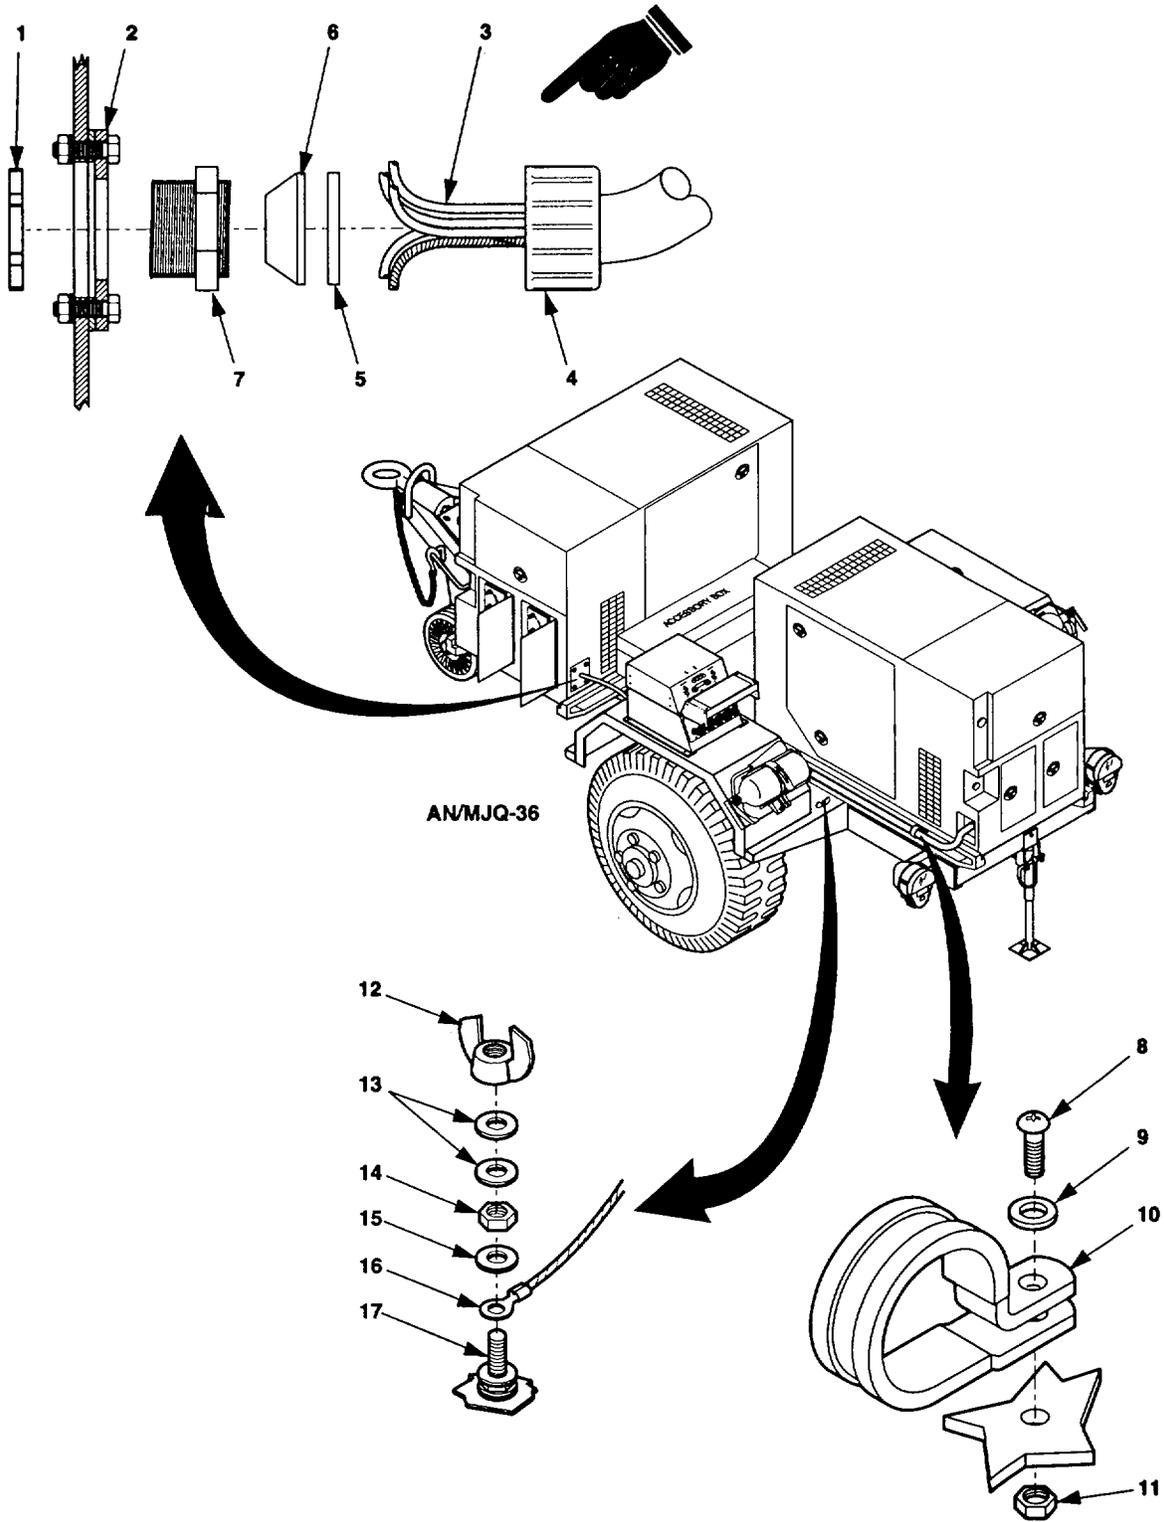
Installation of Power Cables (Sheet 2 of 2).
